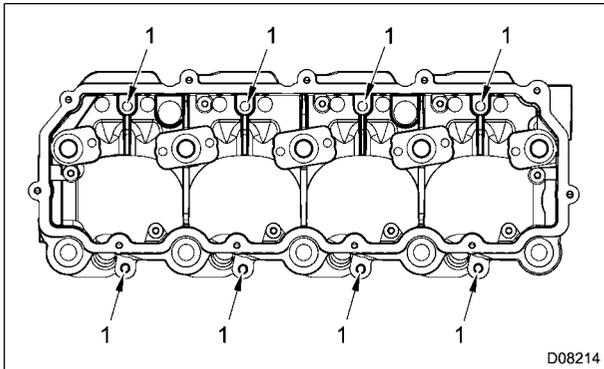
2004 and 2005 Model Year rocker arm carrier (Eight M8 clearance holes)
